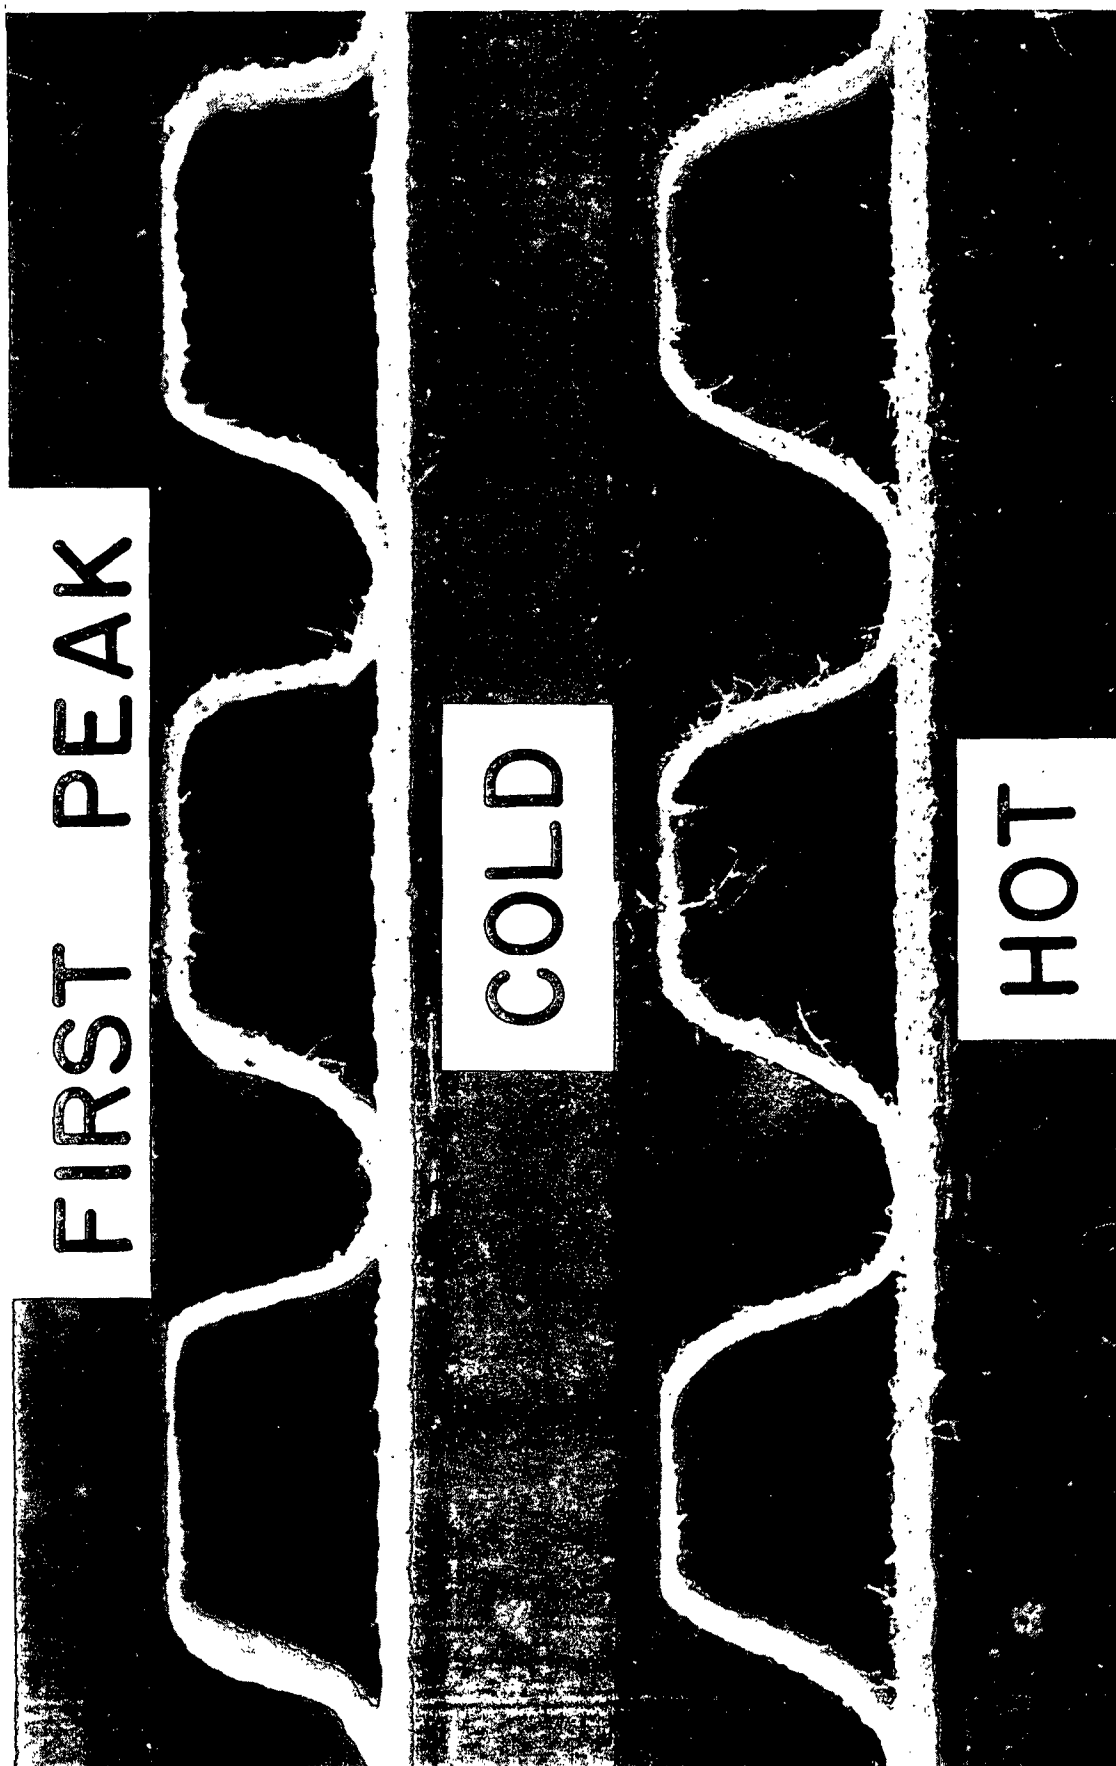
Appearance of Cold and Hot Formed Board at the First Flat Crush Peak (Trailing Flank to Right)
